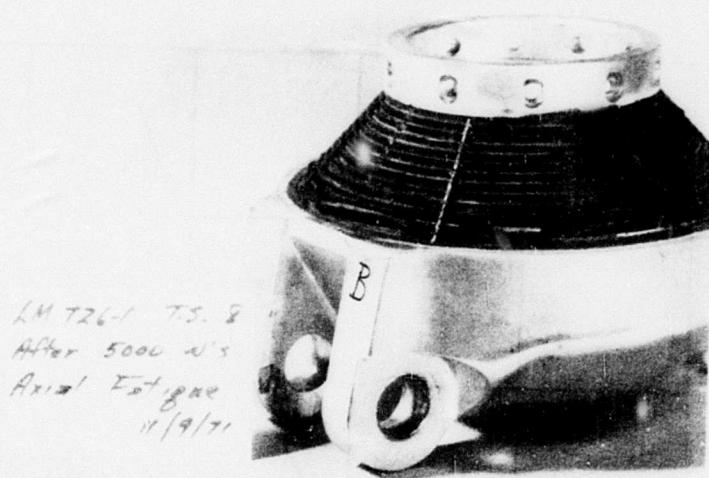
Inboard View of Test Sample 8 After Completion of Axial Fatigue Test.
